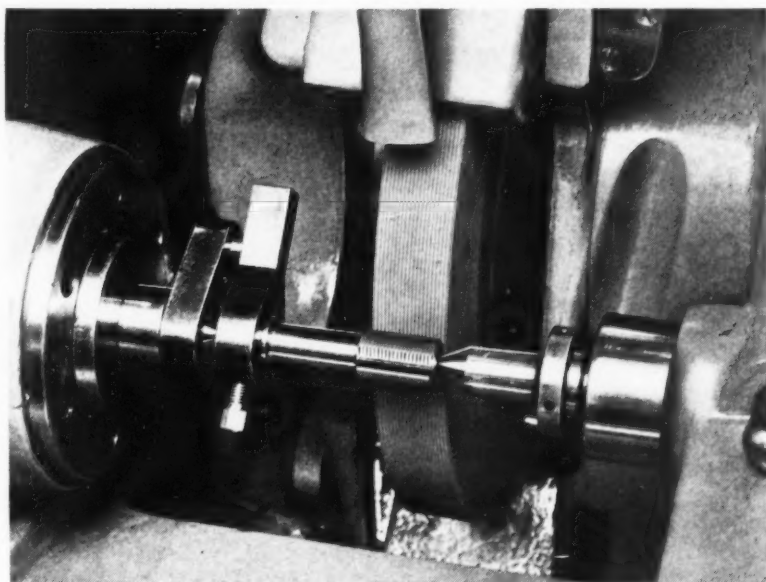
Grinding the Threads on a Stud by a Plunge-cut Multi-edge Grinding Wheel
